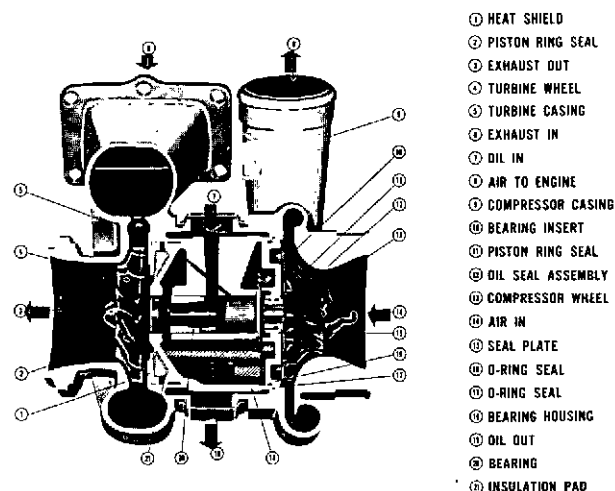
, AWC8, T-50 turbocharger (cross-section)
